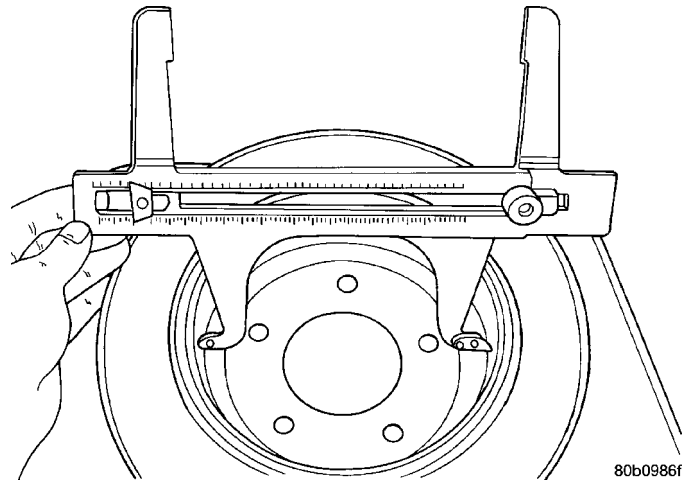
MEASURING PARK BRAKE DRUM DIAMETER
